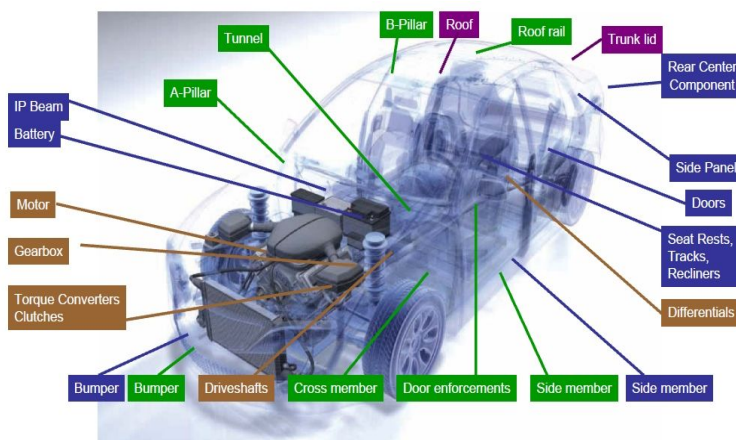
Laser Welding applications - Automotive Industry in details
